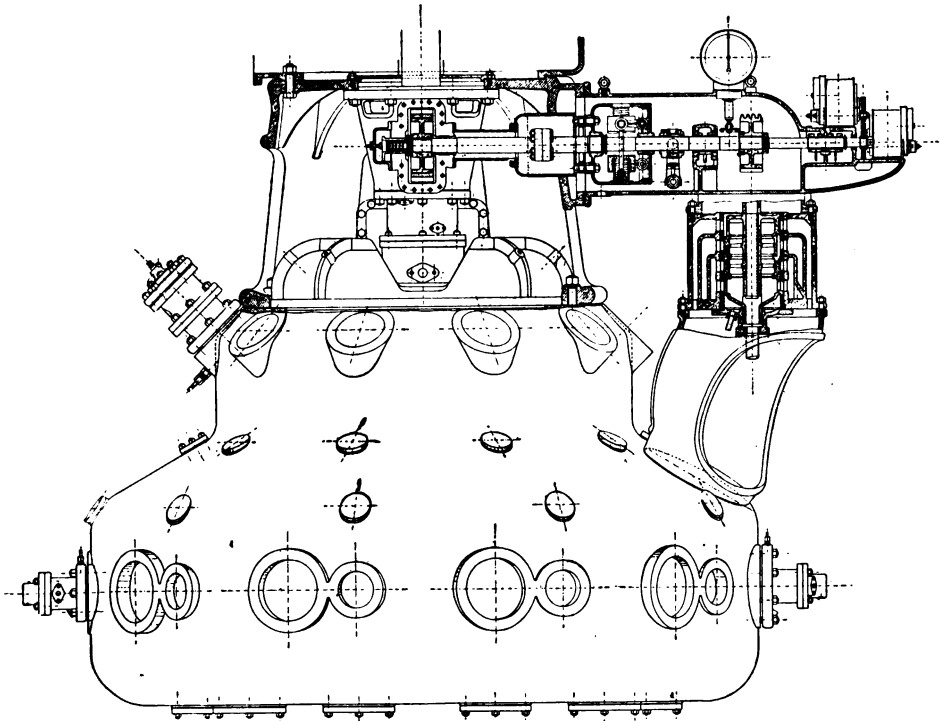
Section through governor shaft of 1000-H.P. turbine.
